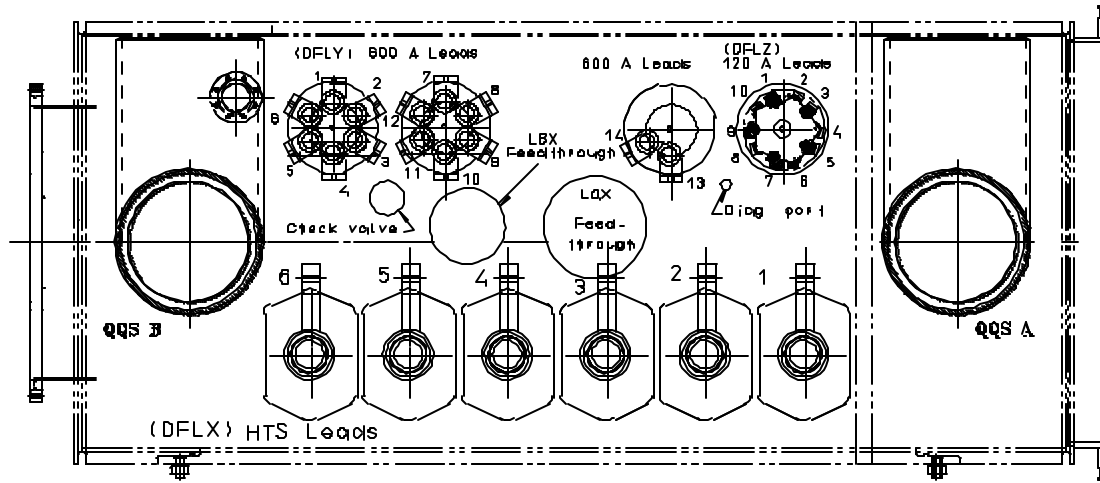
Location of LQX and LBX Instrumentation Feedthrough Assemblies for DFBXC and DFBXG. The LQX assembly is located at $y = -1150$ and the LBX assembly is located at $y = -1440$.
